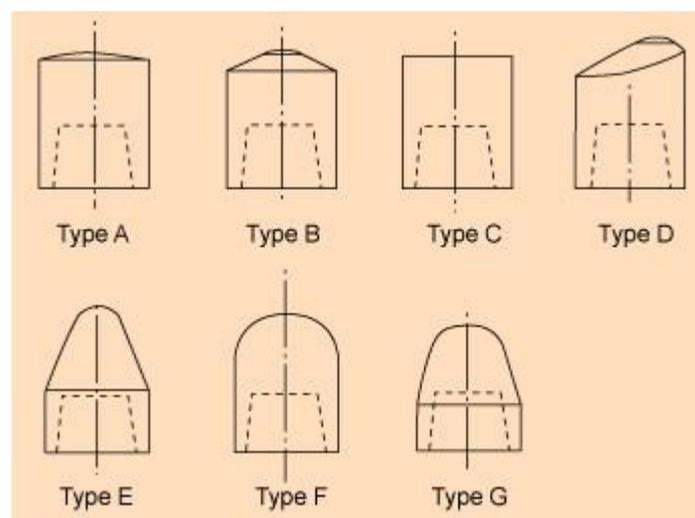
Alternative electrode cap shapes, usually used on portable spot welding guns Source: TWI
